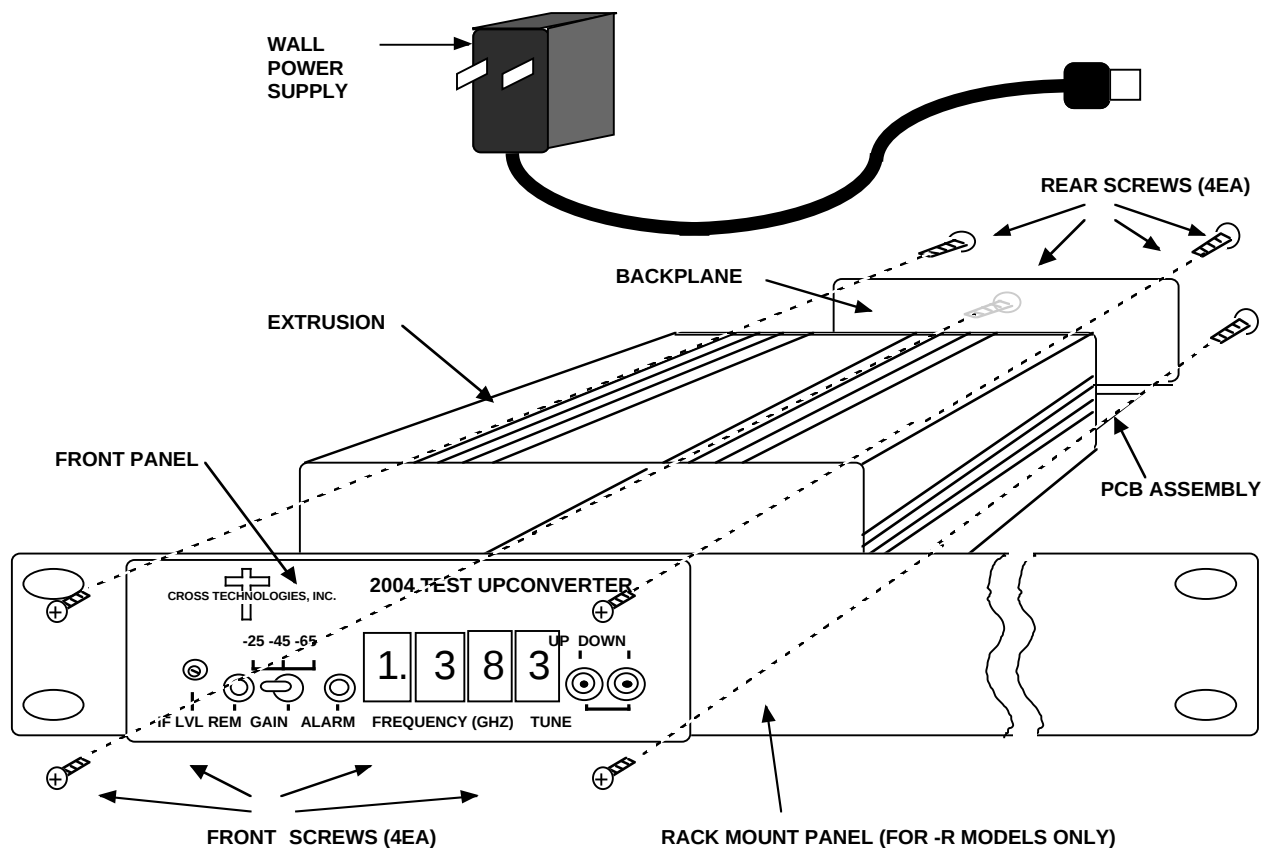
SERIES 2000 ASSEMBLY DRAWING
